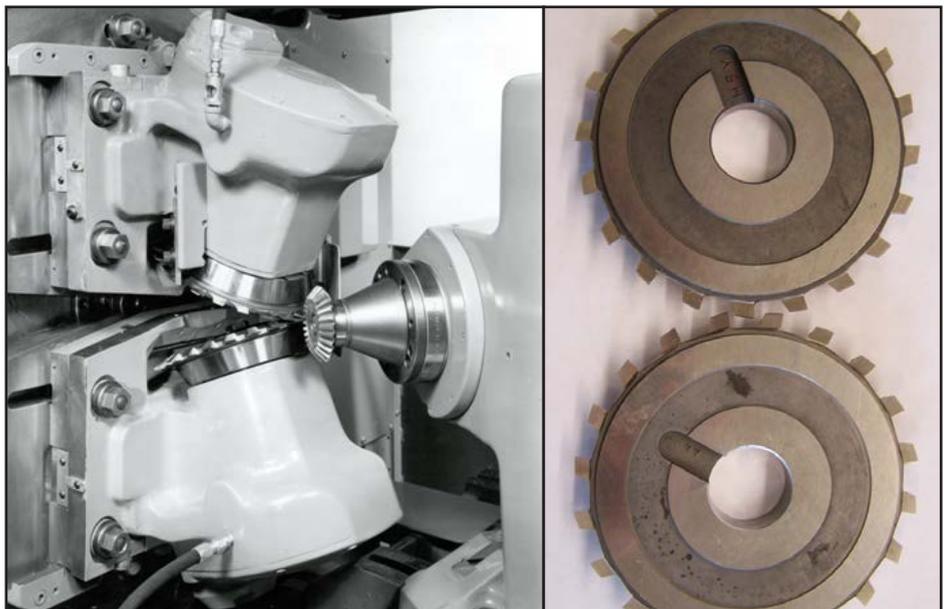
Mechanical Coniflex cutting machine (left) und HSS cutter disks.
